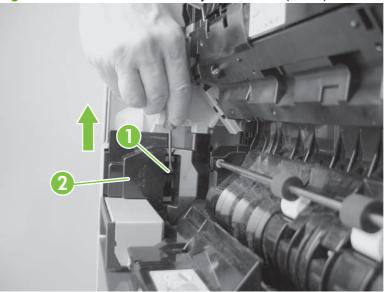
Remove the secondary transfer unit (2 of 9)
